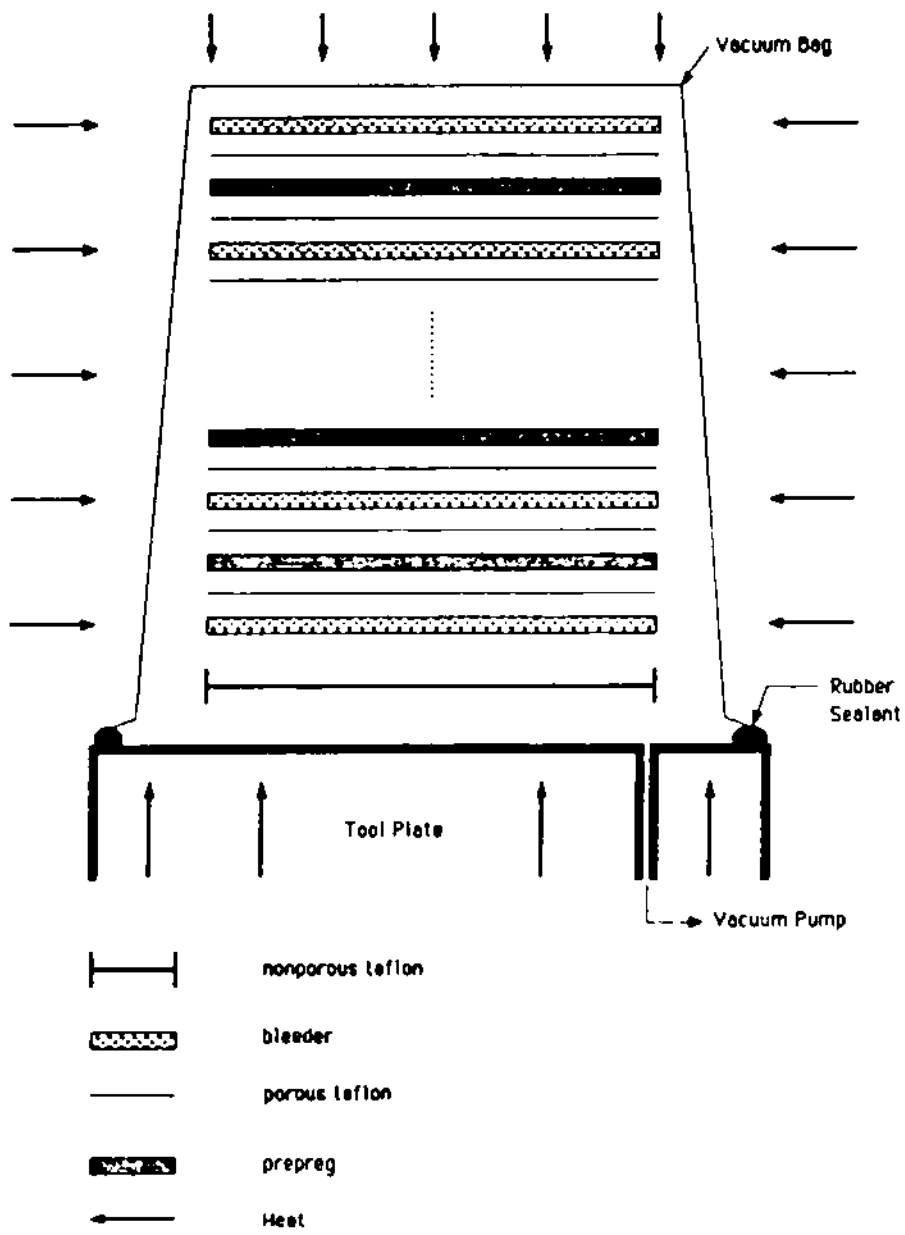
Solvent removal bagging assembly on the tool plate of the autoclave.
